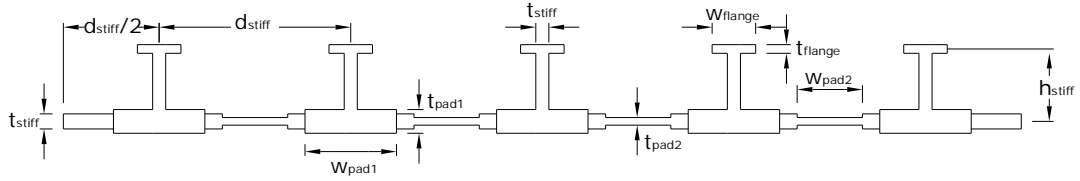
T shaped stiffened plate and pads under stiffeners and between stiffeners
